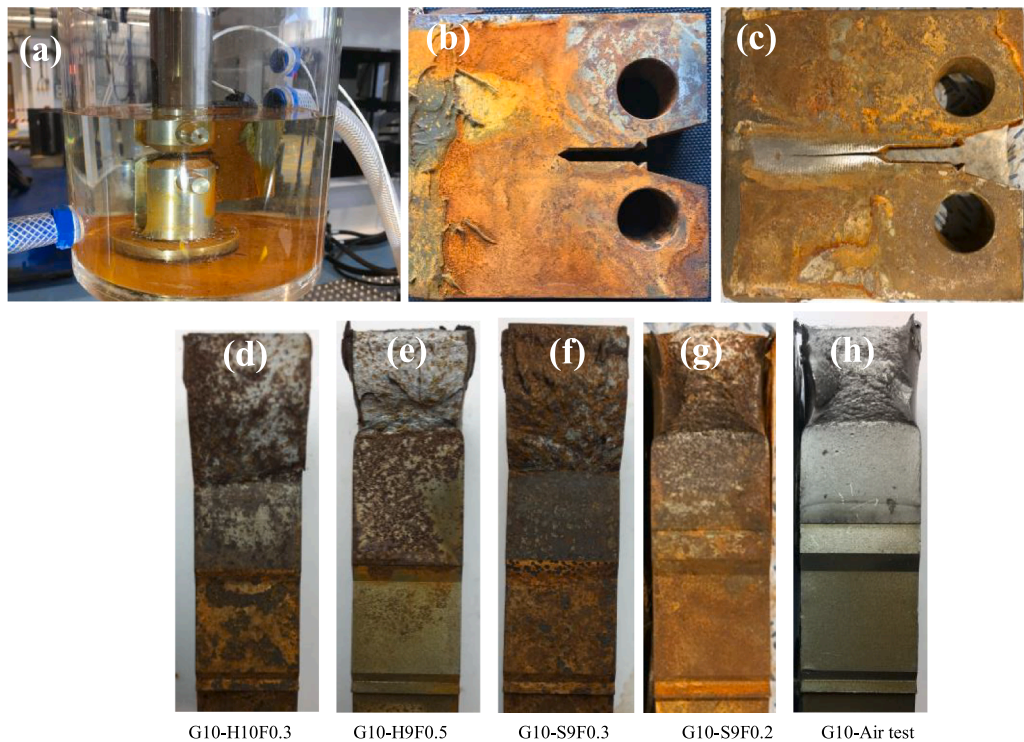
(a) CF experimental set-up (b) side view of the crack path in a CF test specimen, (c & d) examples of fracture surface in two CF test specimens.
